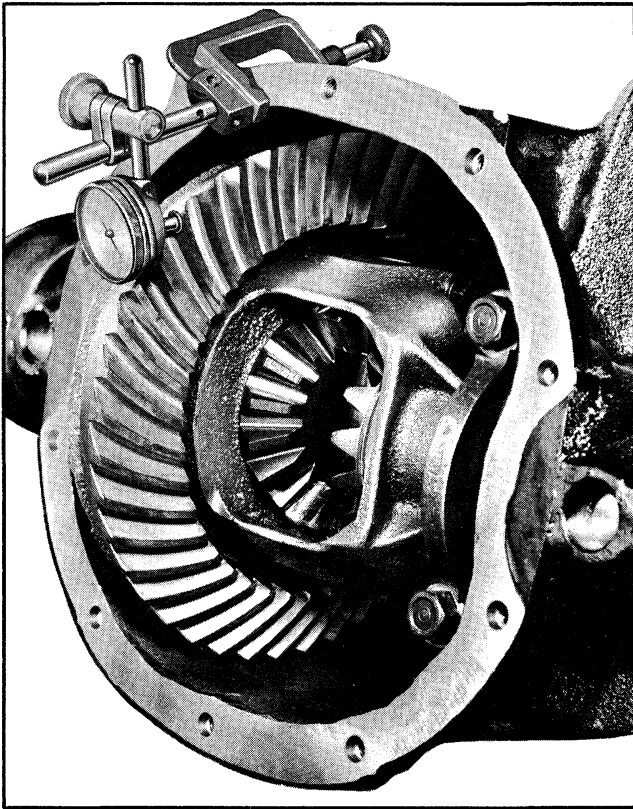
Checking Ring Gear to Pinion Gear Backlash
